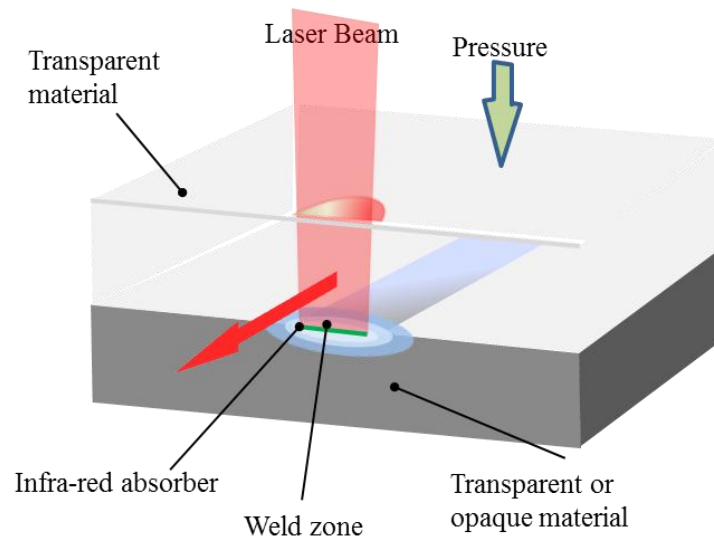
The principle of laser beam welding thermoplastics.
